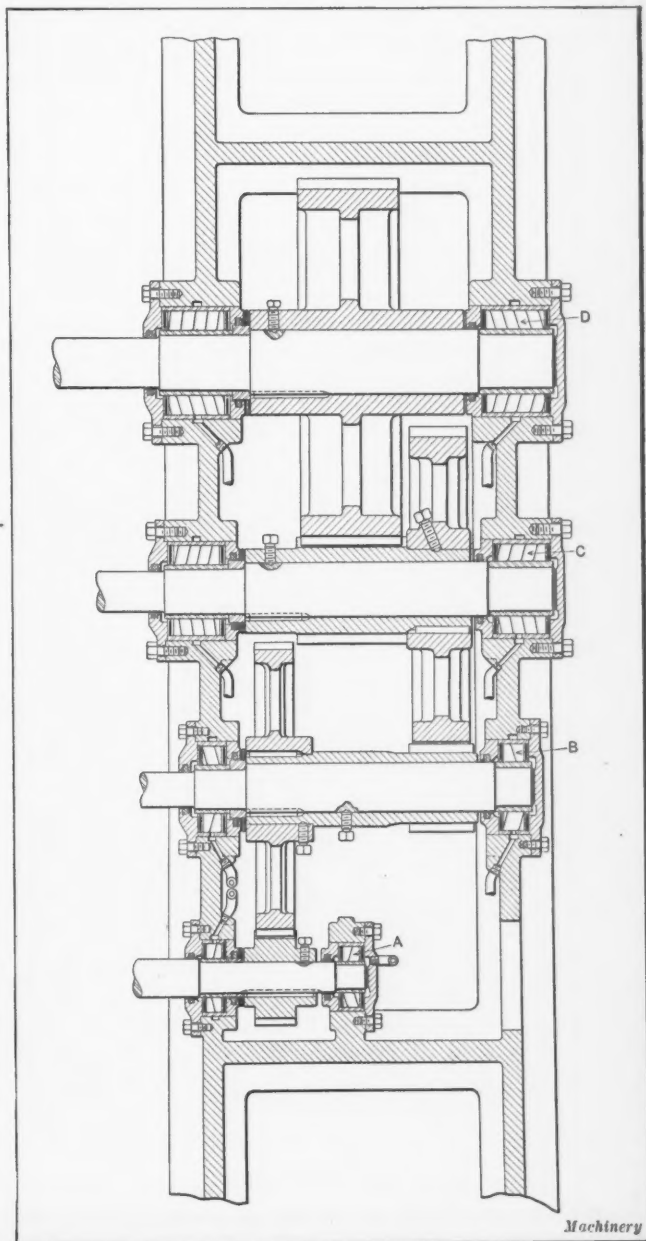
Roller Bearing Mounting for Shafts of Geared Planer Table Drive
